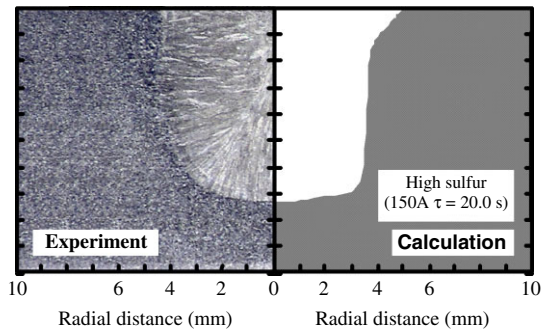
Cross-section of the welding bead of a high sulfur stainless steel
